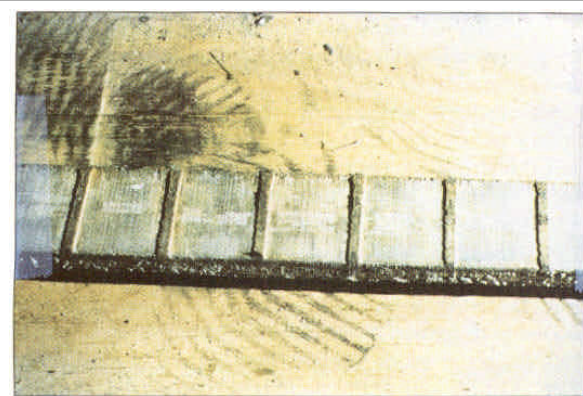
Example of a generator coil removed from a stator bar that failed due to slot discharges. [5]
